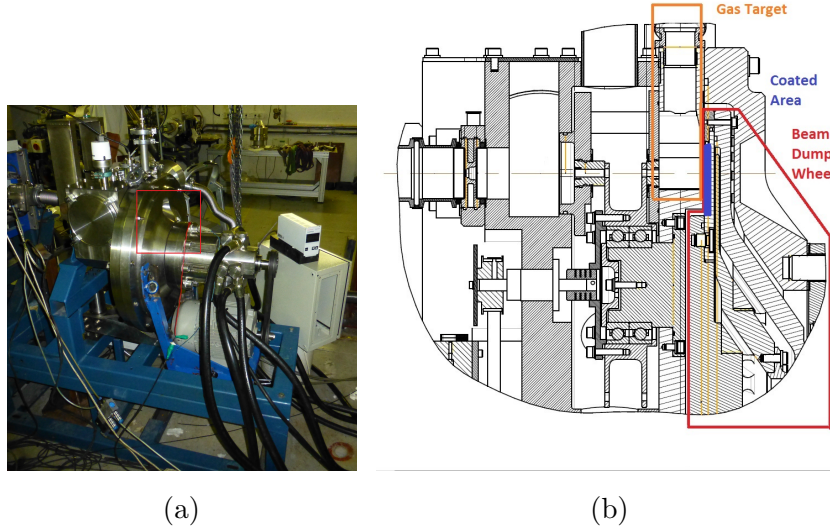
DWIK gas target and beam dump wheel (a) picture (b) detailed view
